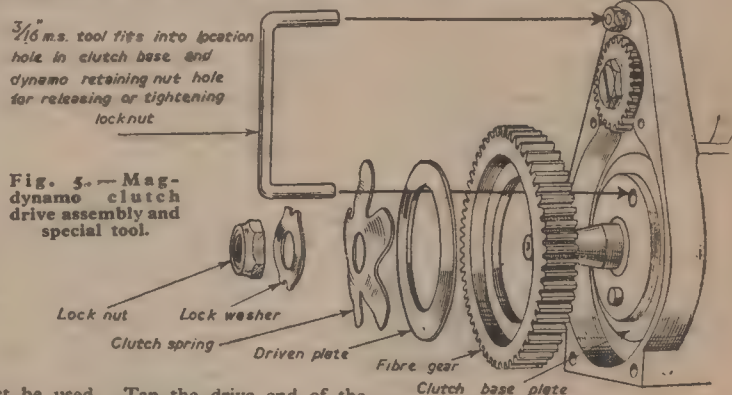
Mag-dynamo clutch drive assembly and special tool.
